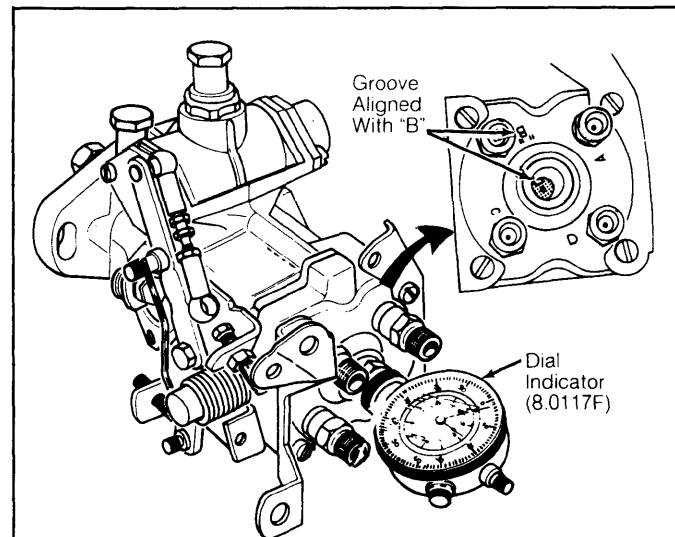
Installing Dial Indicator On EP/VAC Pump
